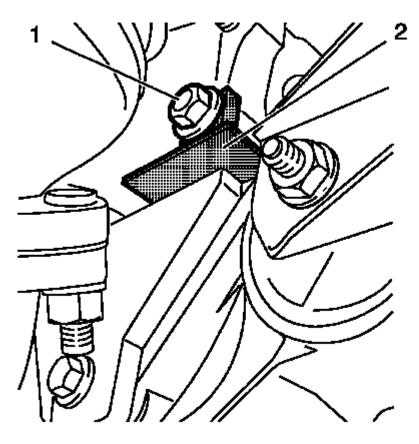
Aligning Balance Shaft Drive Chain Courtesy of GENERAL MOTORS COMPANY
